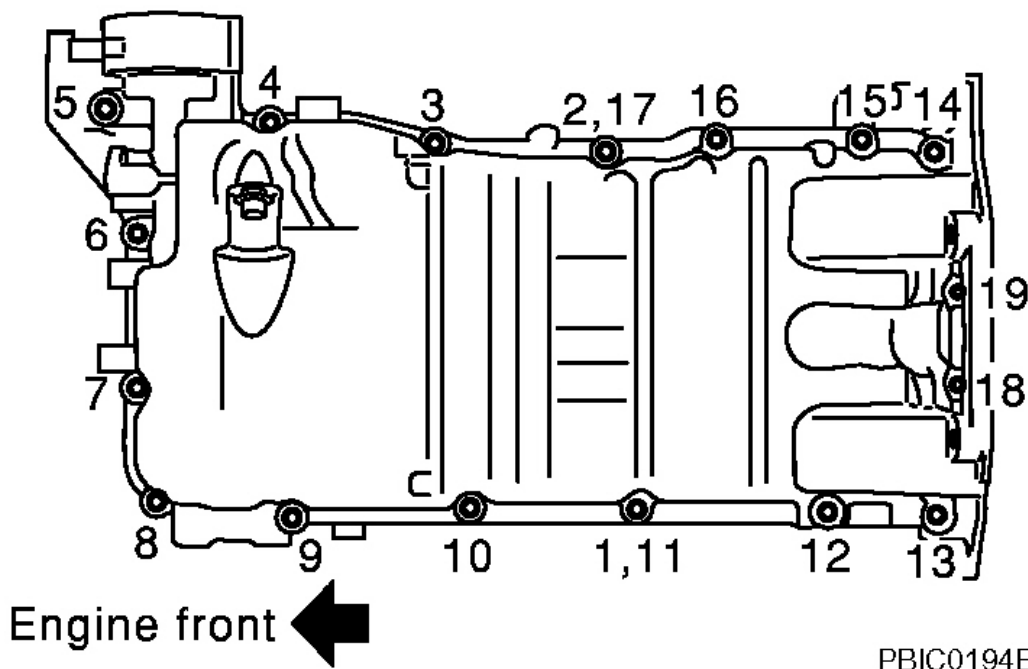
Identifying Tightening Mounting Bolts In Sequence
